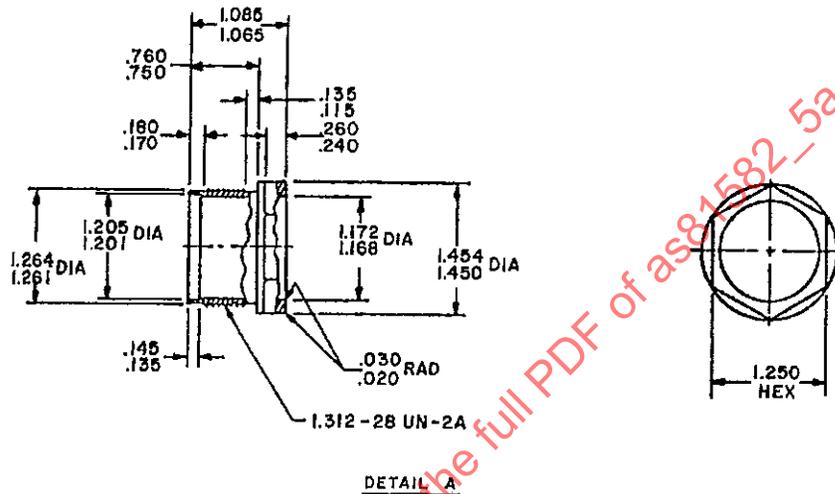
CONNECTOR ADAPTER CONFIGURATION AND DIMENSIONS (DETAIL A)
